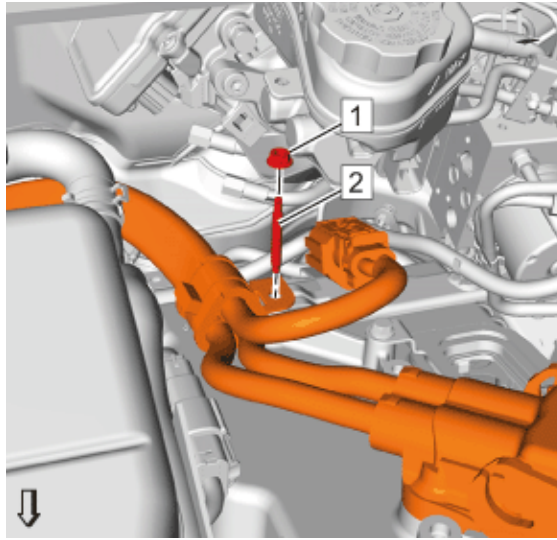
Engine Wiring Harness Bracket Nut And Stud
